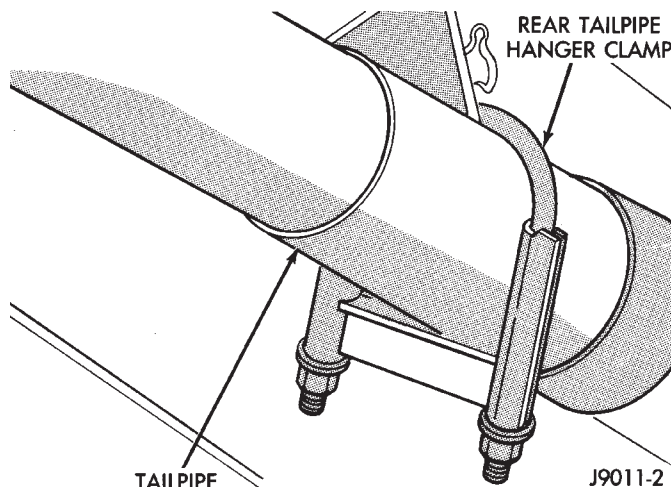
Rear Exhaust Tailpipe Hanger Clamp
